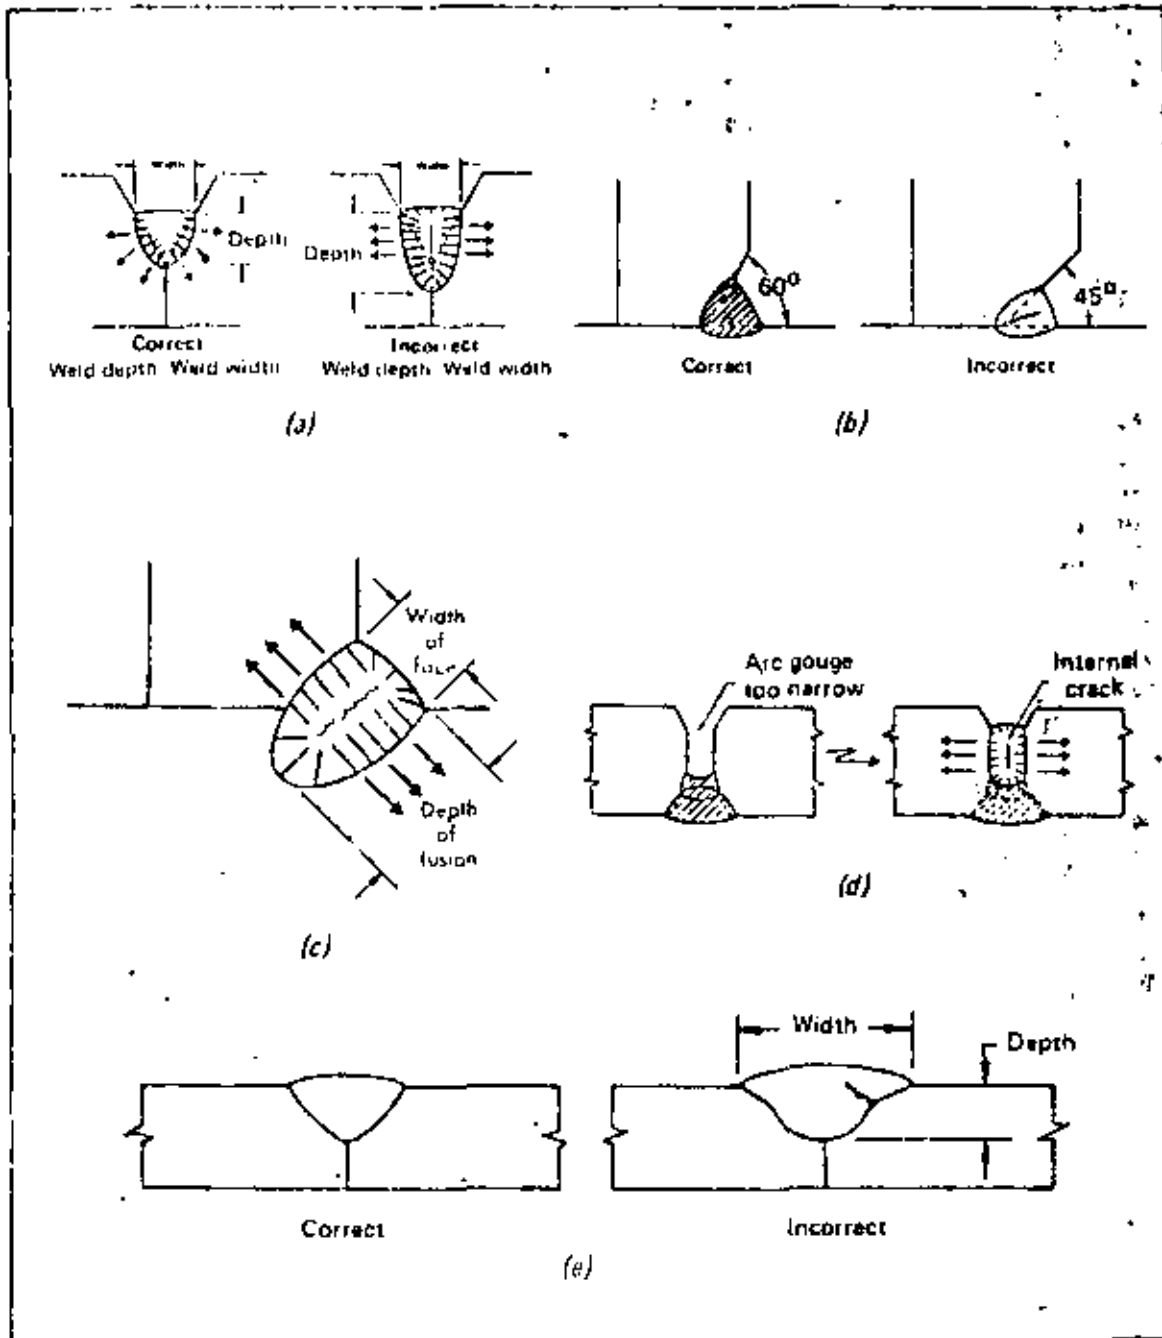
Internal cracking can occur when weld penetration is greater than width. Correct and incorrect proportions are shown in (a), (b), and (c). Arc gouging a groove too narrow for its depth can cause a similar internal crack (d). Cracks can also occur when depth is too shallow (e). Width of a weld should not exceed twice its depth.
